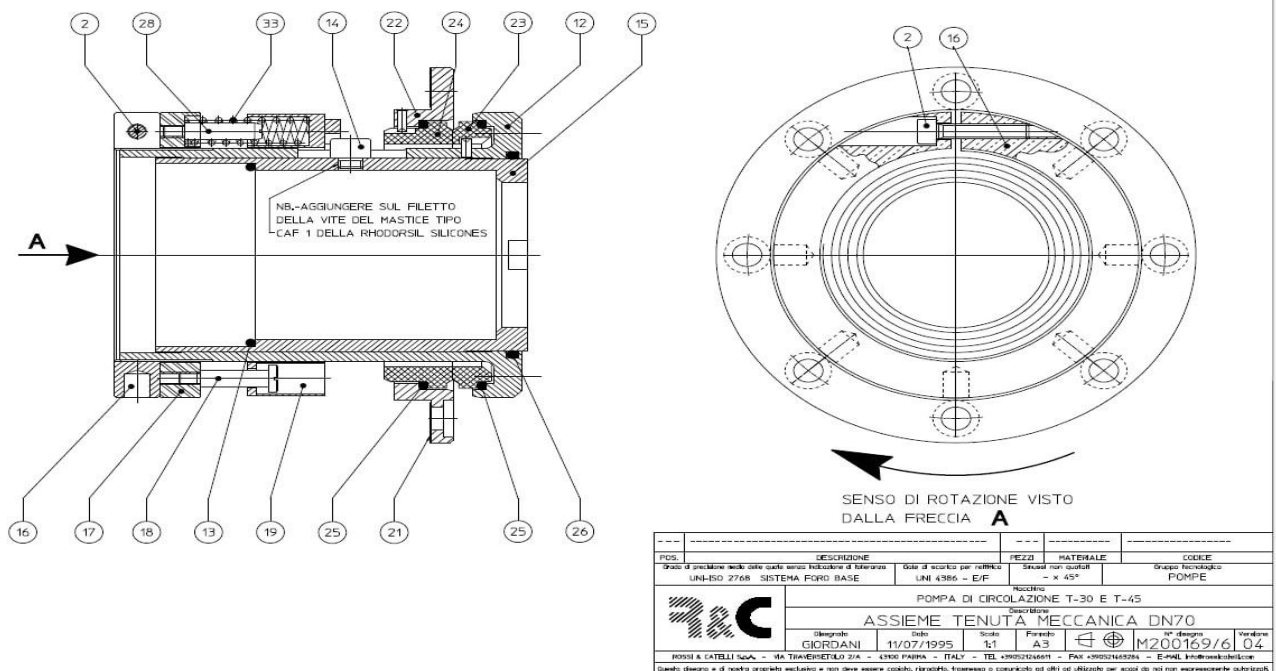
Technical Assembly Drawing of a Motor Shaft seal with Sectional and Top Views
